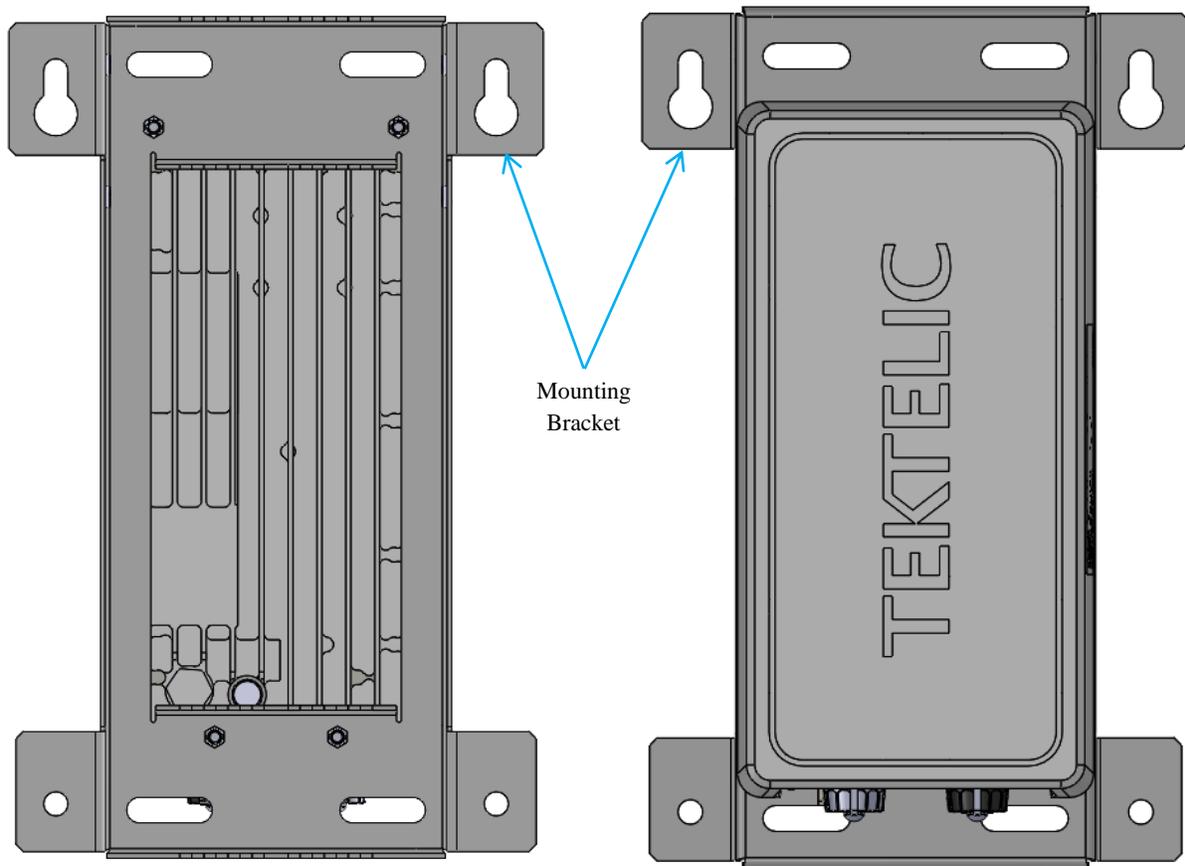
Dish Macro Gateway Module with Mounting Bracket
